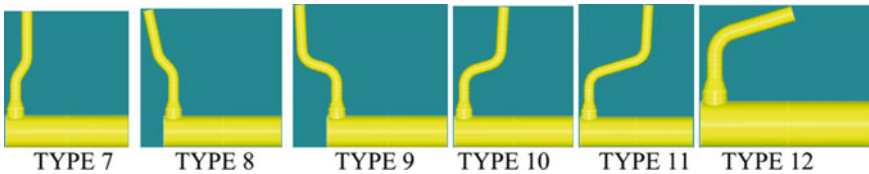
2 inch diameter outlet feeder pipes geometric types
